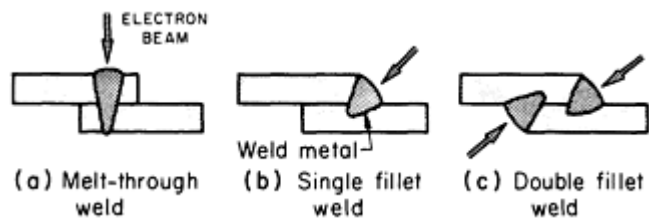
TYPICAL WELDS OBTAINED BY EBW OF LAP JOINTS
